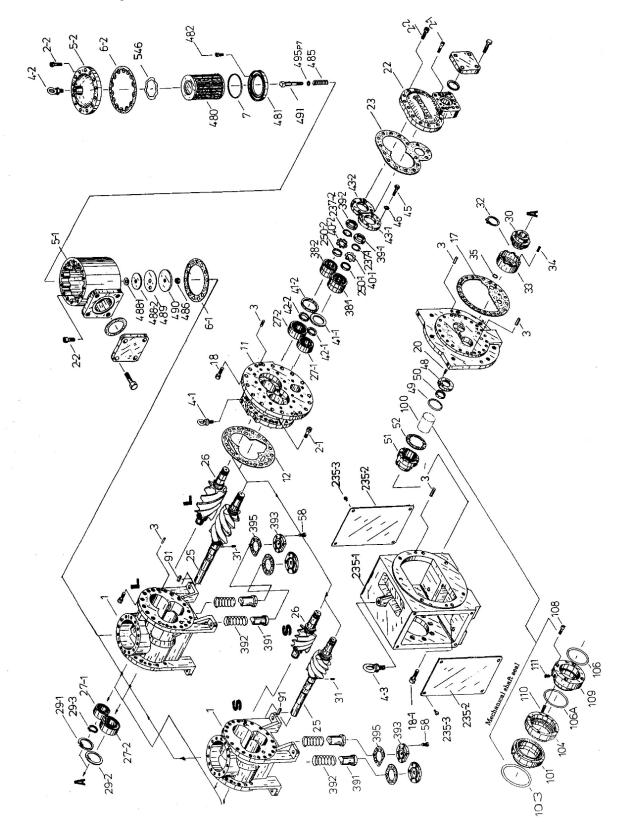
Development View of i125S/L Parts with Motor Spacer
